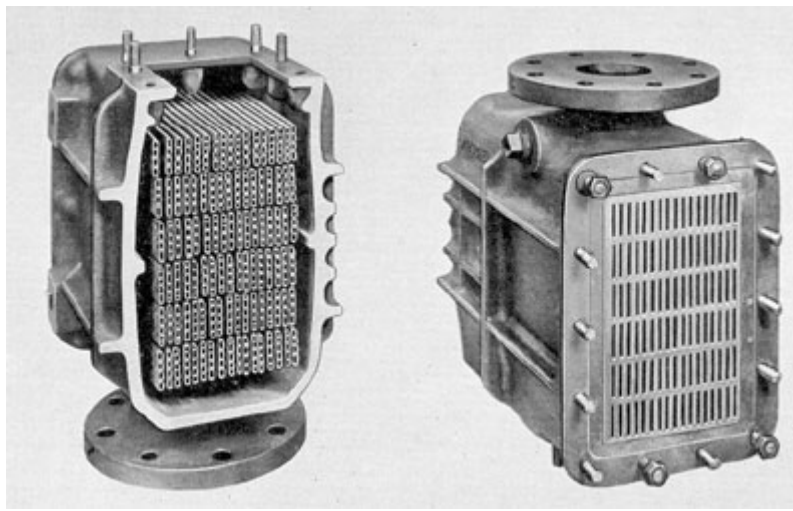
Cutaway of older type Harrison heat exchanger showing internal construction.
